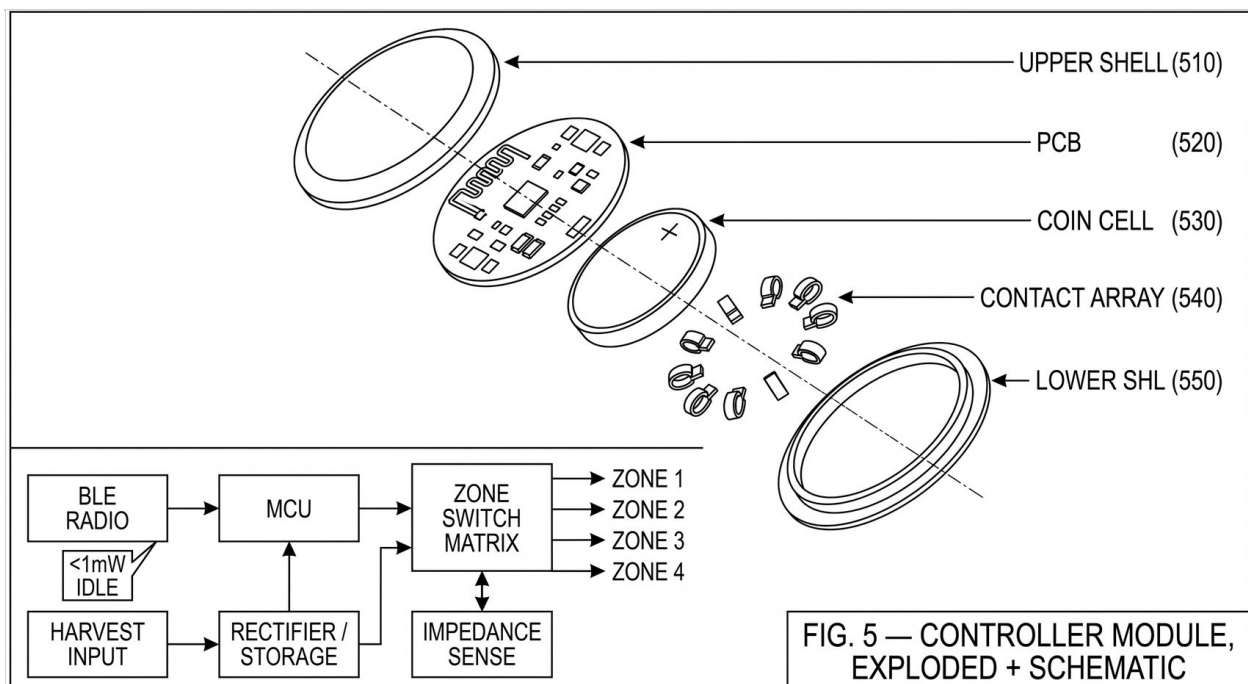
CONTROLLER MODULE, EXPLODED + SCHEMATIC
